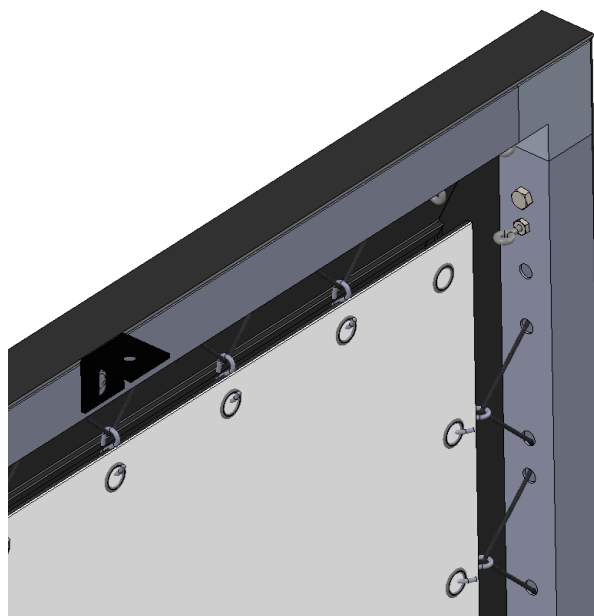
Installing Frame/Screen Assembly - Rear View, Close Up
